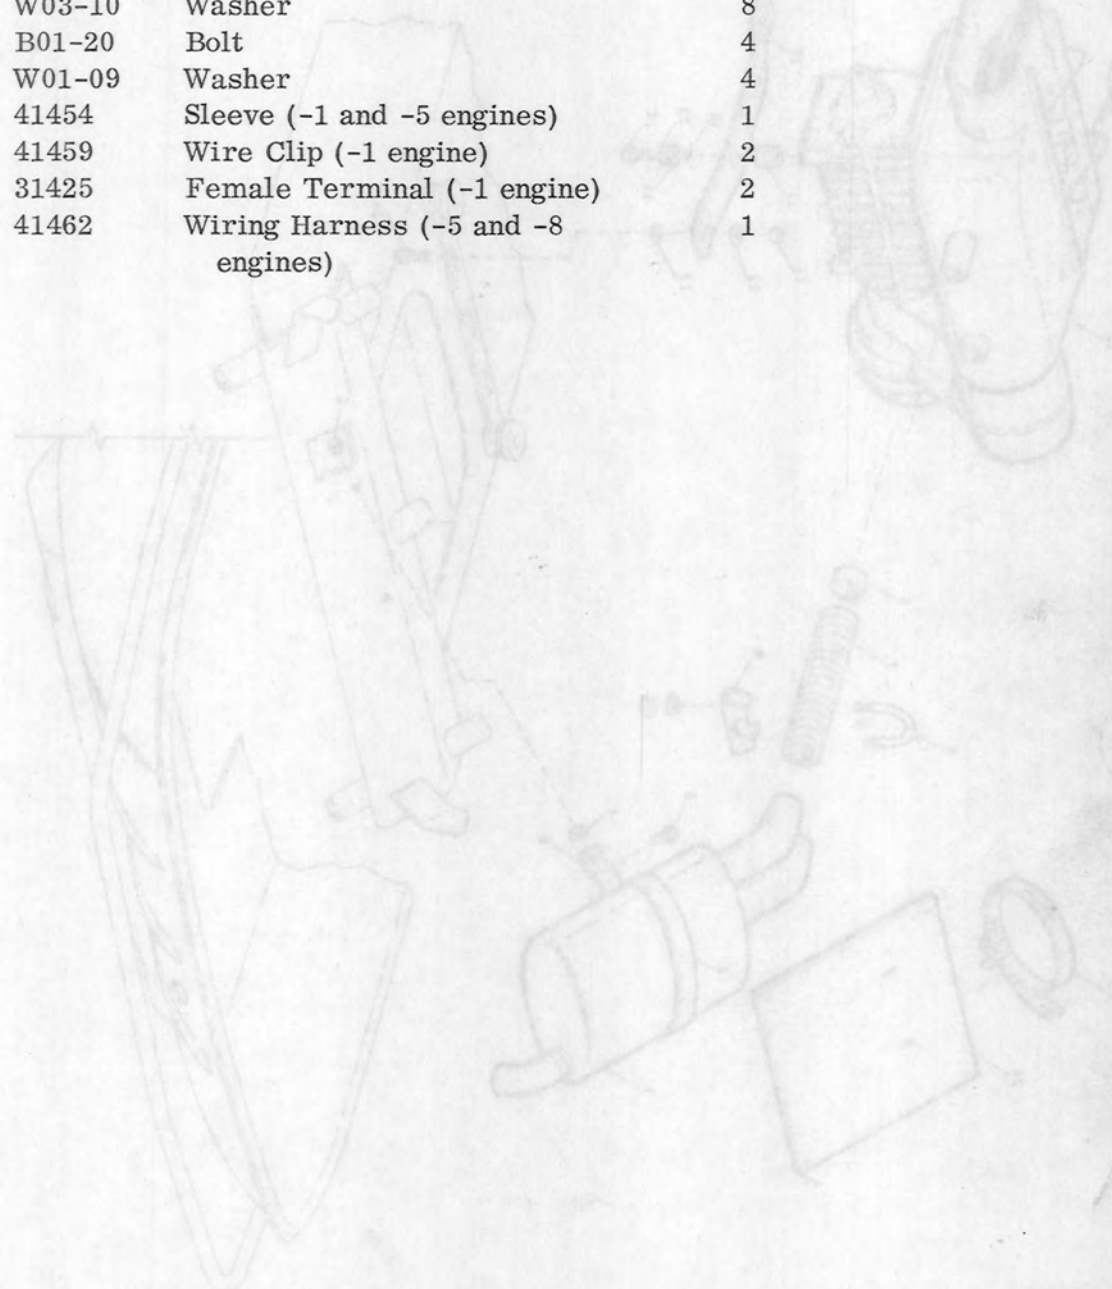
MUFFLER AND ENGINE MOUNTINGS - CCW
